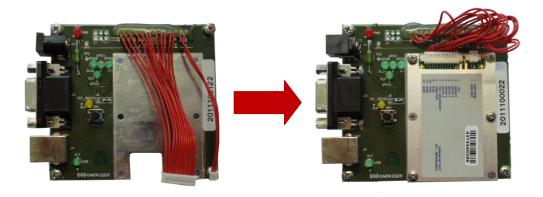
Connection of the Muon A528B module to the A528ADAT adapter board
